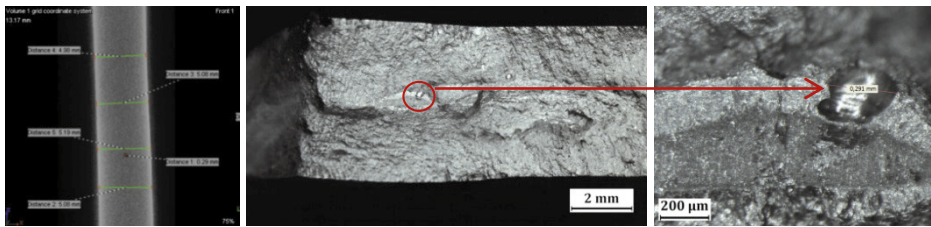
Fatigue fracture surface of a welded specimen ($\sigma_{max}=500$ MPa).
